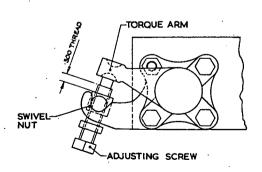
INITIAL SETTING OF ADJUSTING SCREW.
